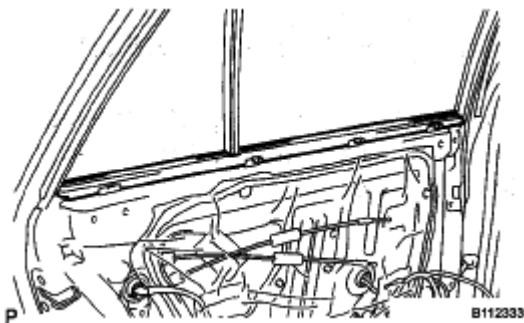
Identifying Rear Door Glass Weatherstrip Inner
